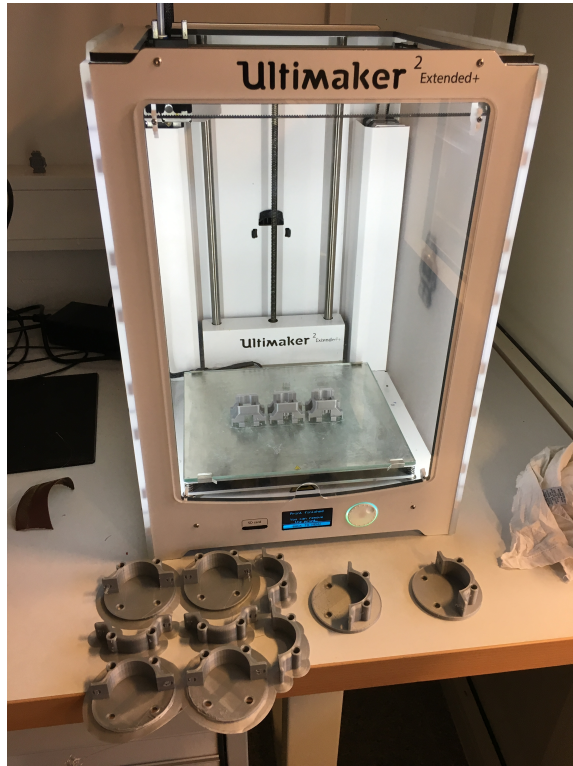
3D printed end mounts for the aluminium pipes.
